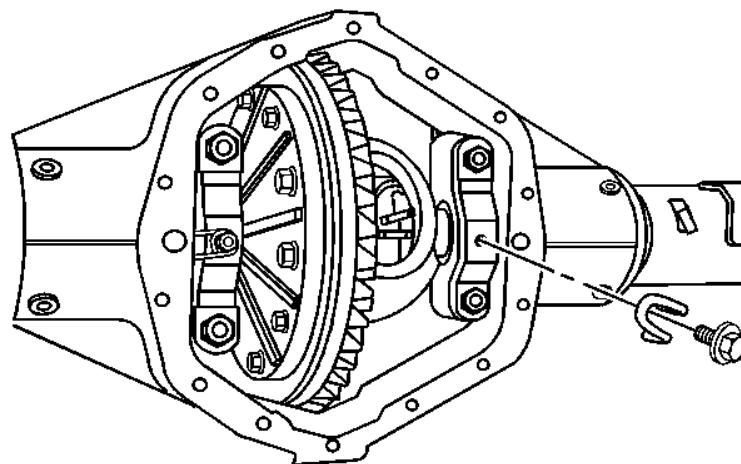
Removing Differential Bearing Adjuster Nut Retainers
